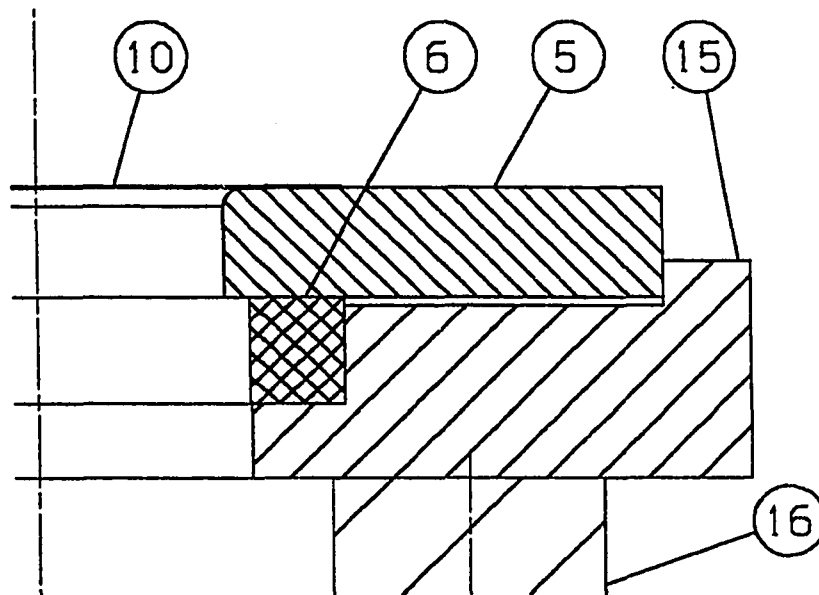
First stage die assembly, and the positioning of the hollow loadcell for the blankholder force measurements.
